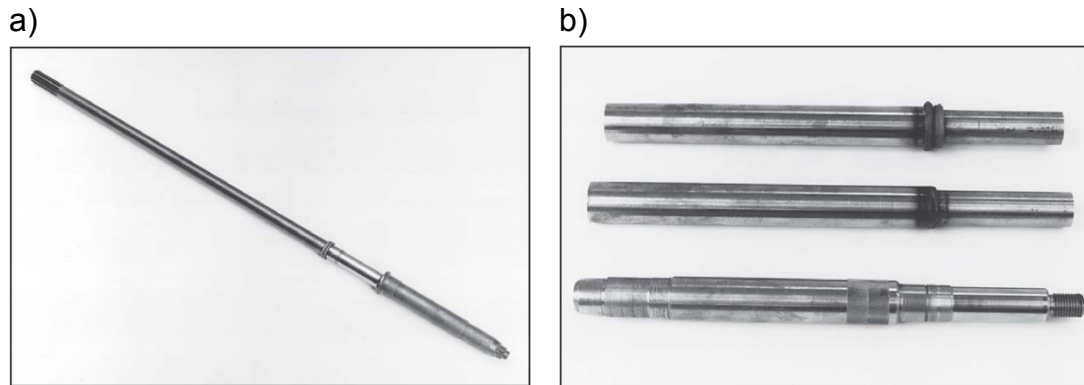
a) Carbon steel/stainless steel marine outboard engine drive shaft and b) Bimetallic pump motor shaft.
